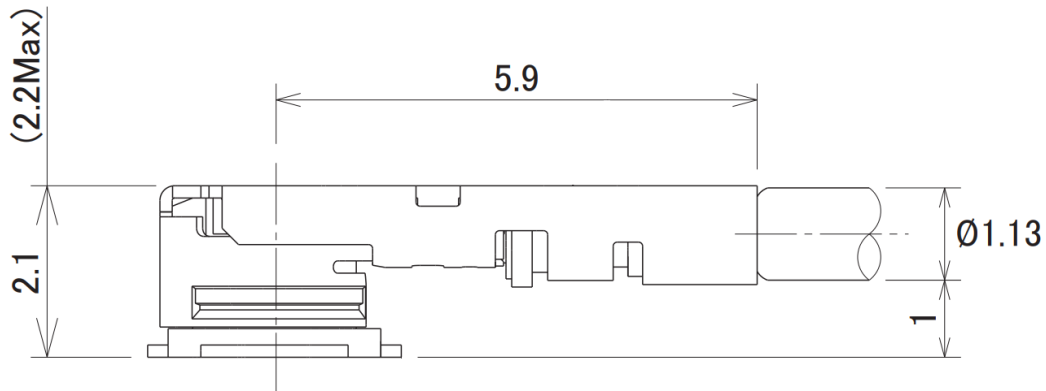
Space Factor of Mated Connectors (Ø 1.13 mm Coaxial Cables) (Unit: mm)
